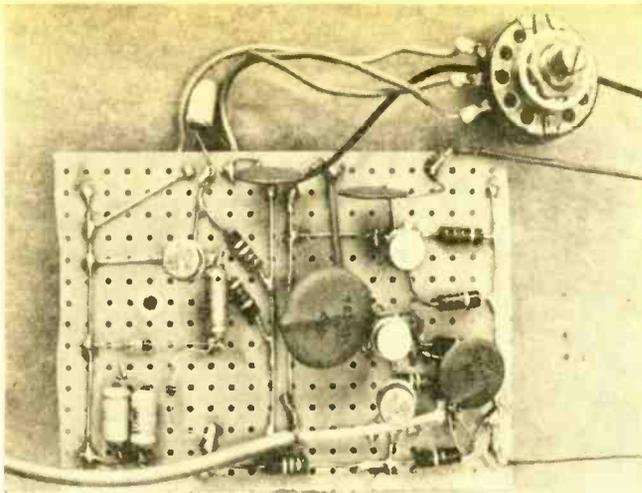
Wiring up transistor circuits calls for different wiring techniques. Parts are smaller and can be placed on a phenolic board stamped with many evenly spaced mounting holes.
